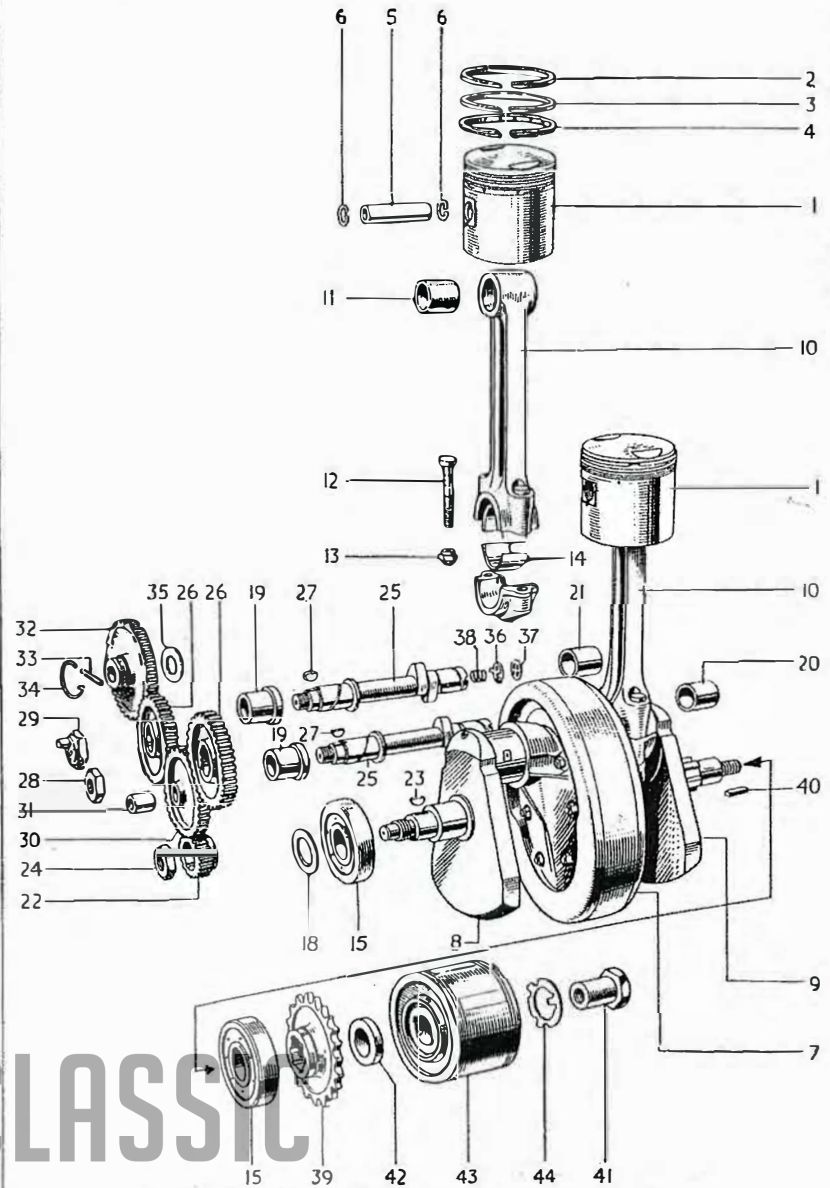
CRANKSHAFT, CONNECTING RODS, PISTON TIMING GEAR, etc.
